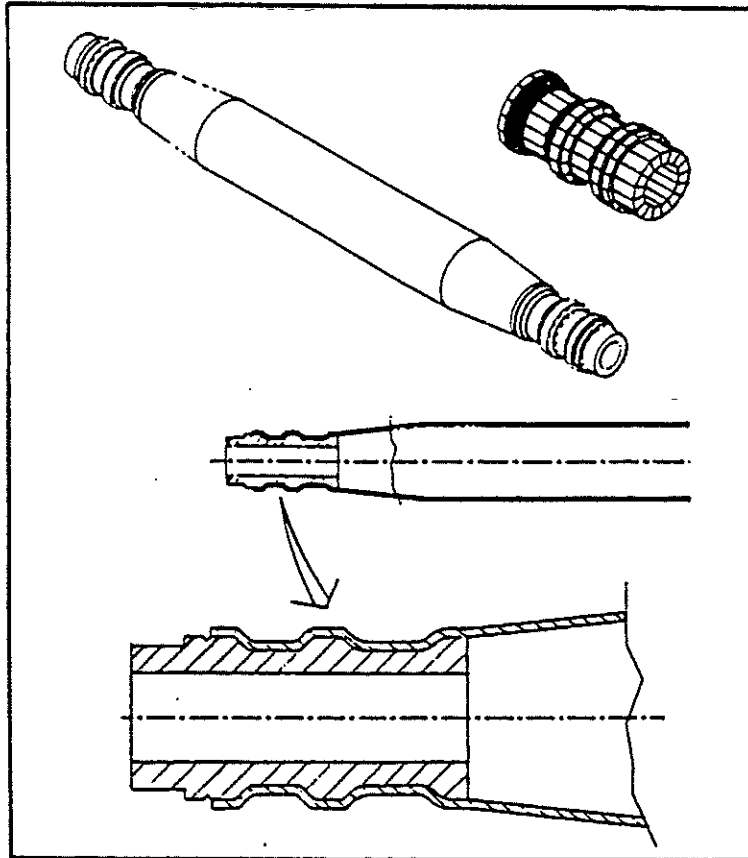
Crank arm : general view, meridian cross section, zoom of the head zone.
